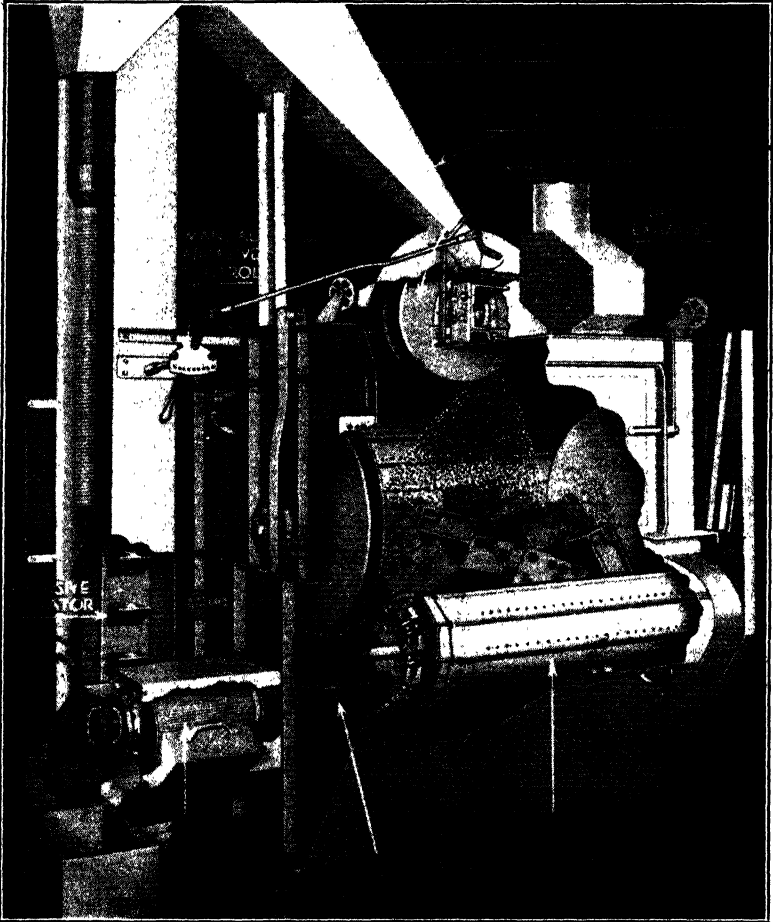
Airless abrasive blasting. Phantom view of Wheelabrator Tumbleblast illustrates operation of machine. (Courtesy of American Wheelabrator & Equipment Corp., Mishawaka, Ind.)
